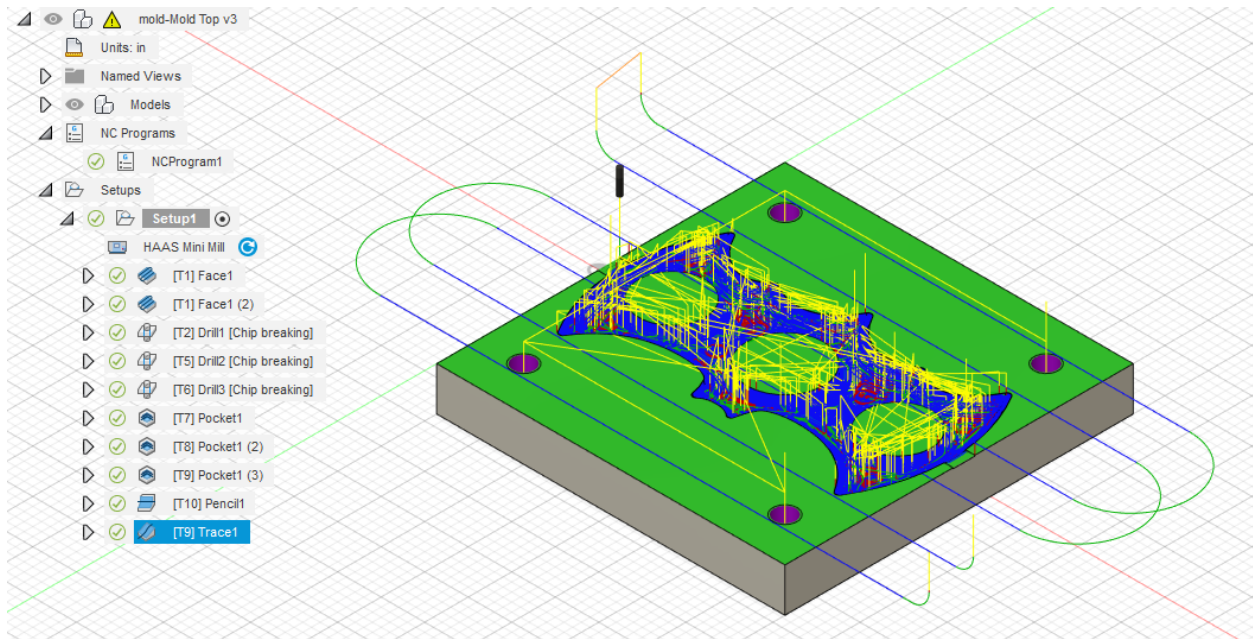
Fusion 360 simulated CAM of CNC milling manufacturing process
